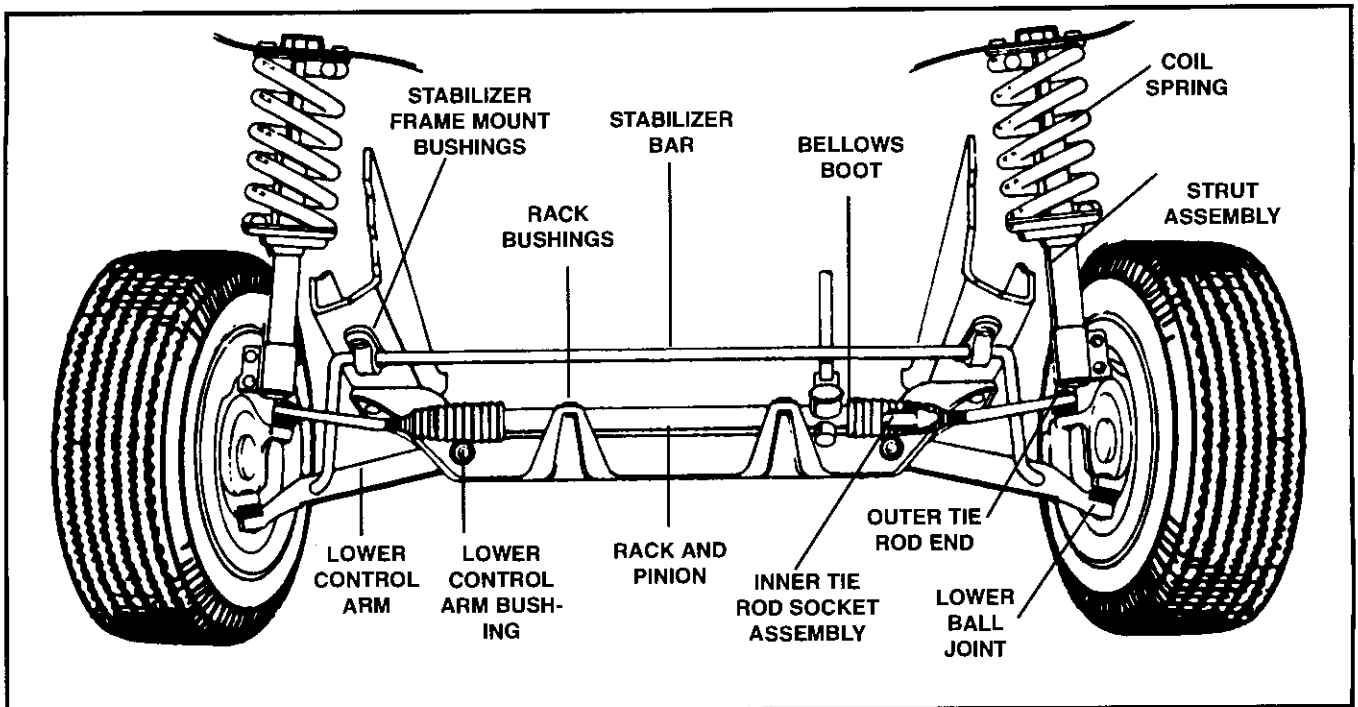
Rack and Pinion Systems Have Replaced Most Linkage System Designs (Courtesy of DANA)
